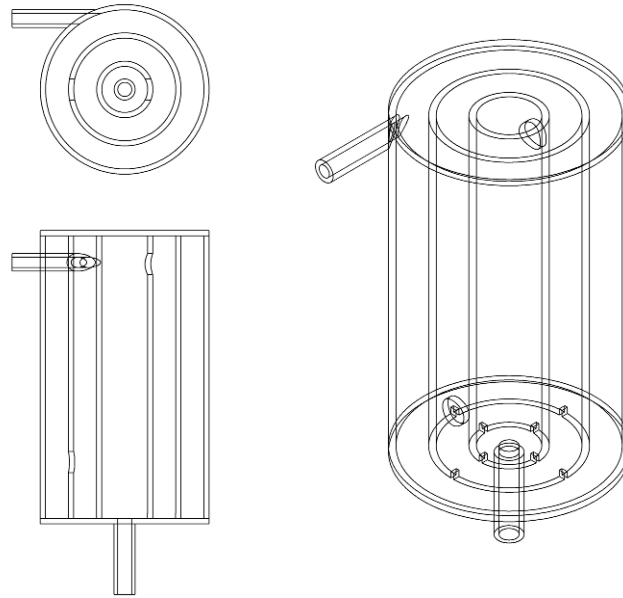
Fluid column test section Geometry #3 with concentric baffles
